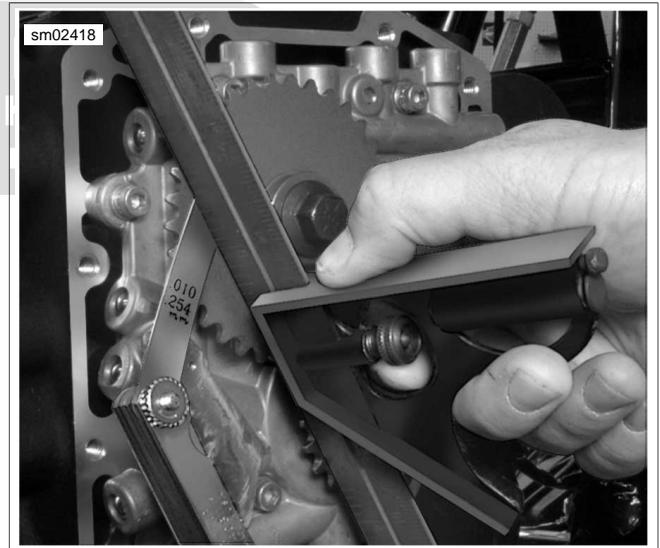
Check Alignment of Crank and Rear Cam Sprocket Faces
